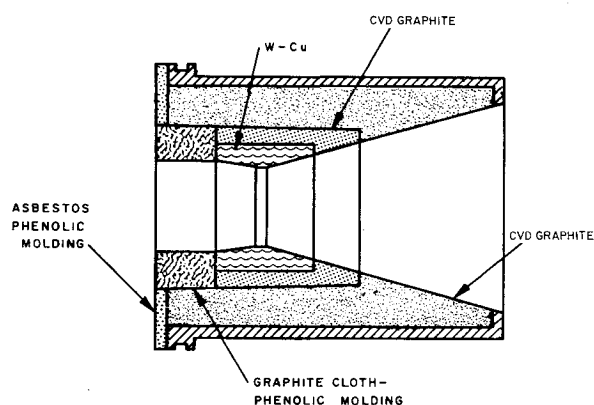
Flightweight static test nozzle for 12-in. hybrid motor
